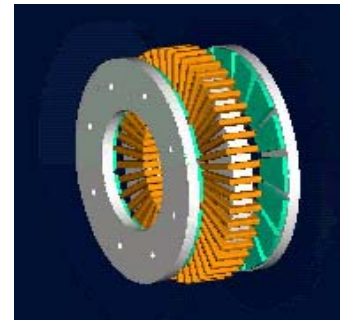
Design of stator and rotor of axial flux permanent magnet motor
